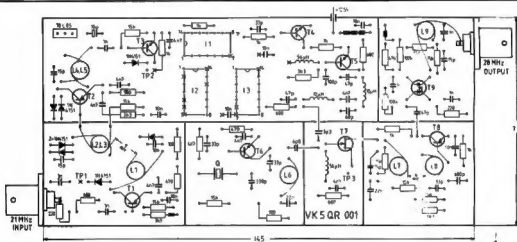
Component mounting diagram for the processor PCB VK5QR 001.
